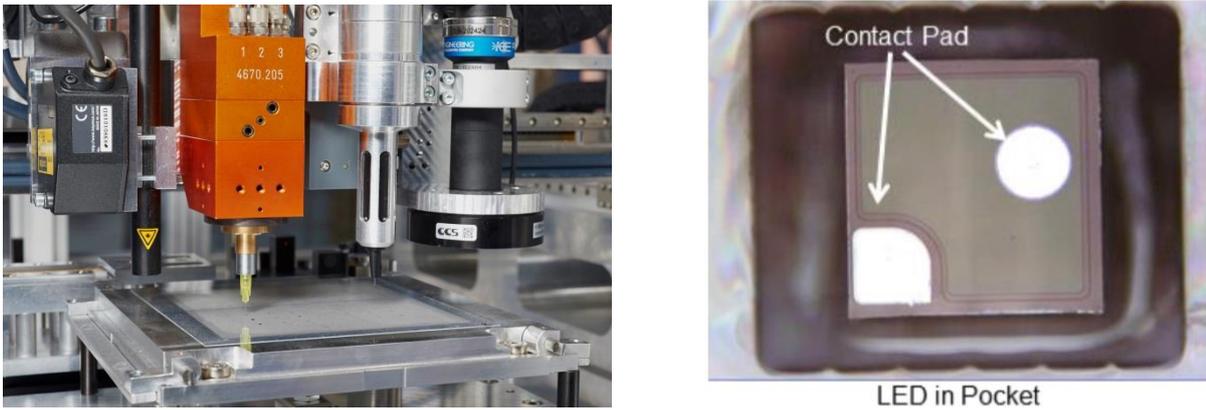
Assembly module in final setup (left) and LED chip placed in adhesive-filled pocket (right)
